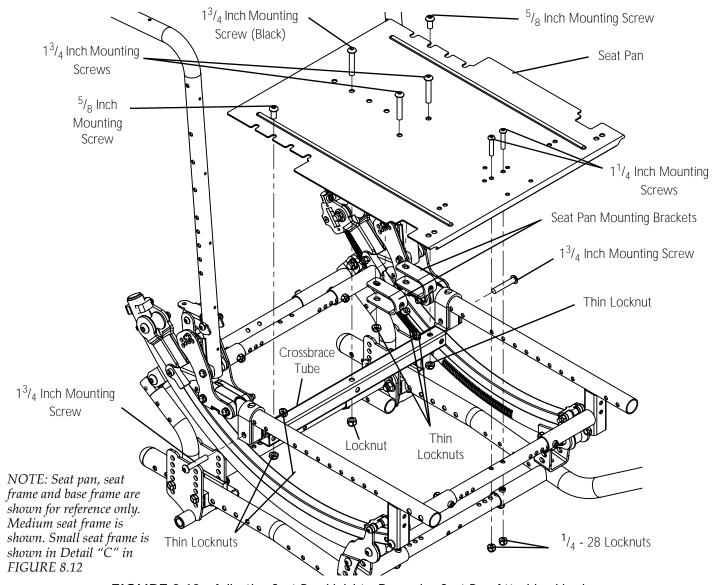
Adjusting Seat Pan Height - Removing Seat Pan Attaching Hardware
